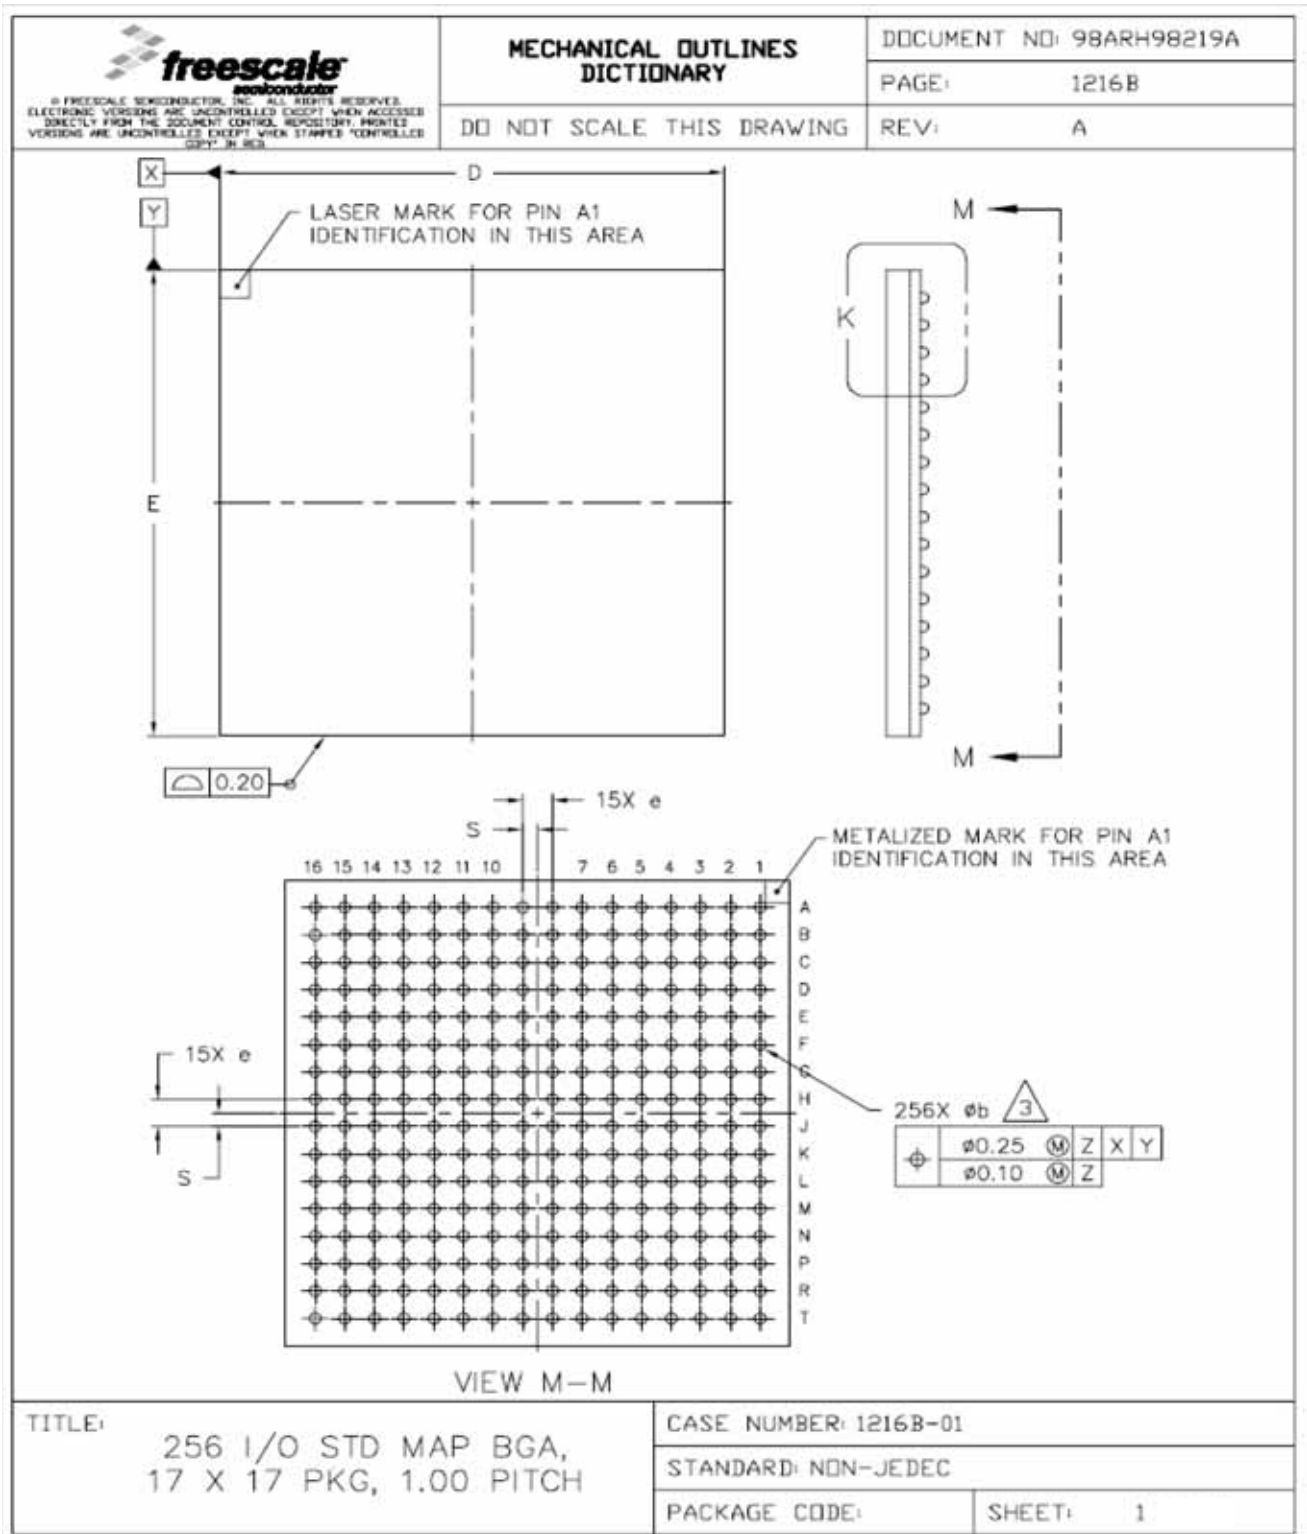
256 MAPBGA mechanical drawing (Part 1 of 2)
